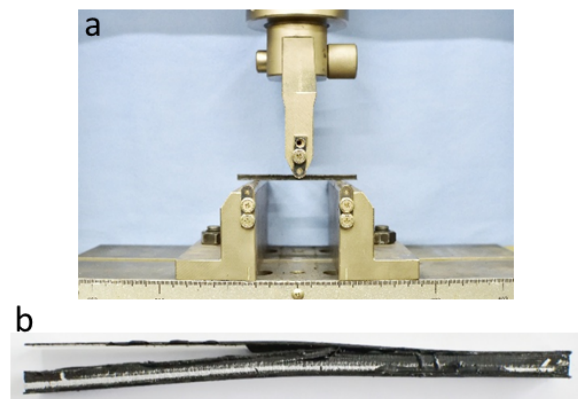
Steel skin – SMC 3-points bending test setting and (b) specimen after failure
